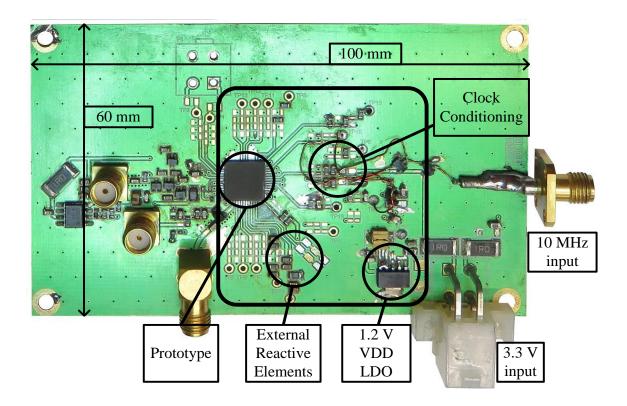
Photograph with dimensions of the PCB used to test the prototype IC.
